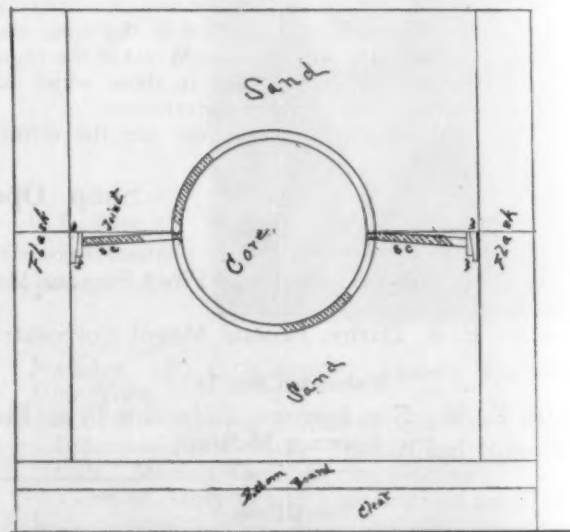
Mold Section. SC—Side Chaplets; W—Wedges
